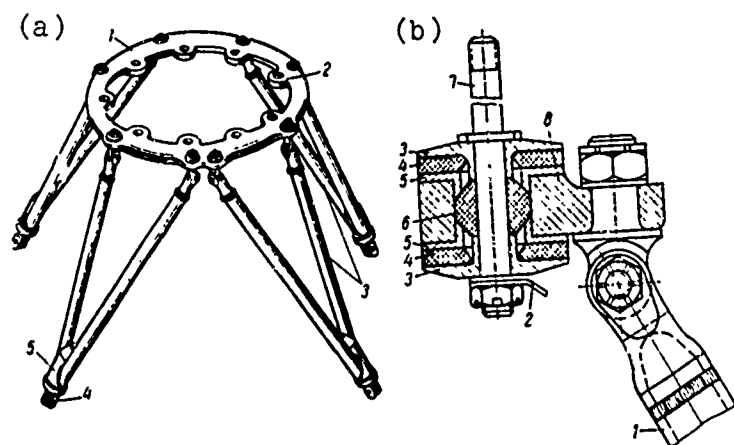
Modernized mount and engine mounting lug: (a) modernized M6400-0 mount: 1 - ring of mount; 2 - engine mounting lug; 3 - rods; 4 - forked bolt; 5 - damper; (b) engine mounting lug to the ring of the mount: 1 - rod of mount; 2 - metallization cross piece; 3 - washer; 4 - rubber shock absorbers; 5 - bushings; 6 - rubber ring; 7 - bolt; 8 - ring of mount.
